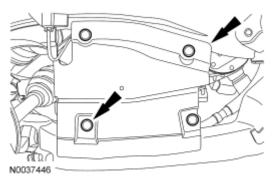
Locating Splash Shield Pin-Type Retainers Courtesy of FORD MOTOR CO.
